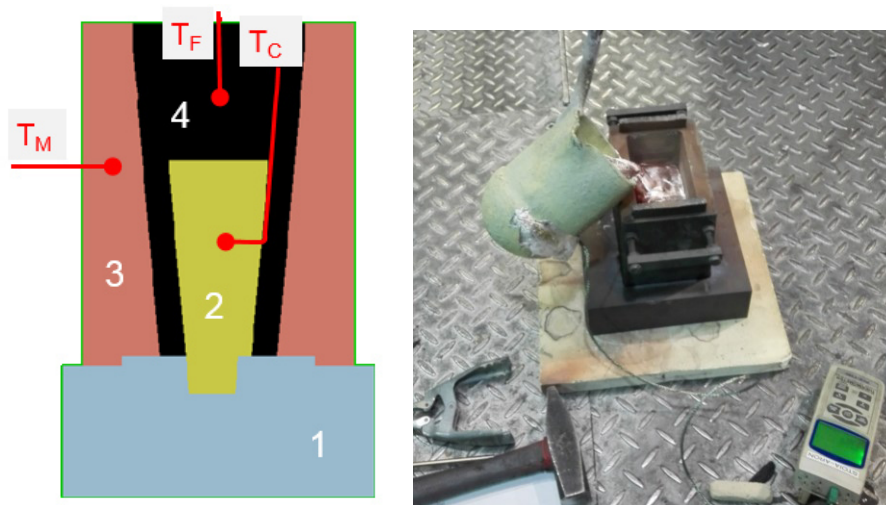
left: Schematic cross section through the mould setup consisting of (1) a base plate, (2) a core, and (3) the upper mould part. The casting is formed in the cavity (4). The thermocouple positions are: T_M in the mould, T_C in the core centre, and T_F in the feeder centre. Right: Casting of a test part.
